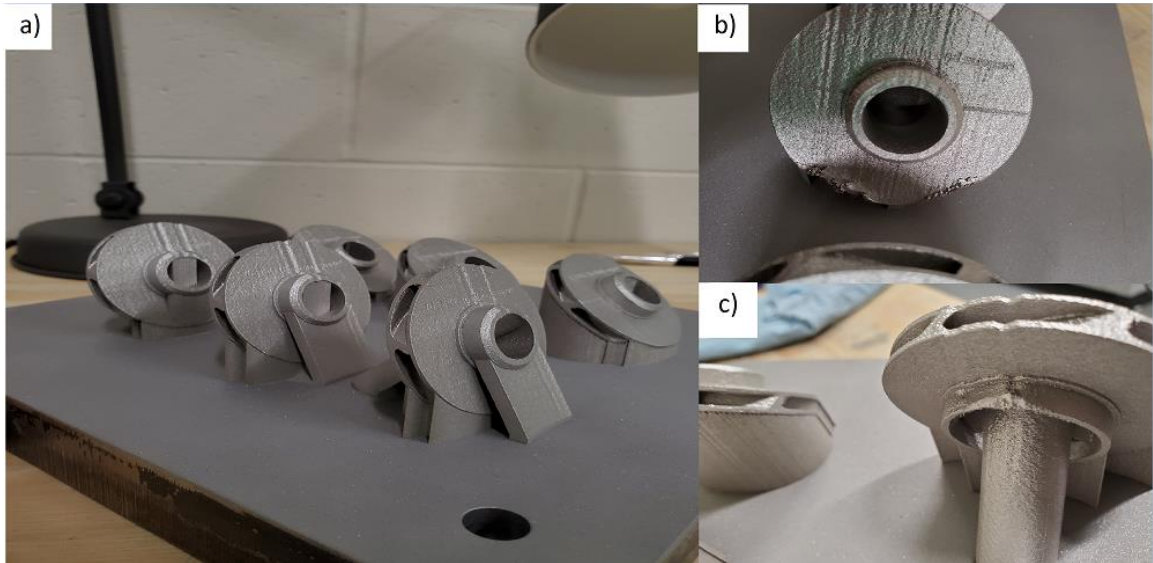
316L print: a) full build, b) Unsupported outer surface failure (45-degree impeller), c) Unsupported hole failure (70-degree impeller)
